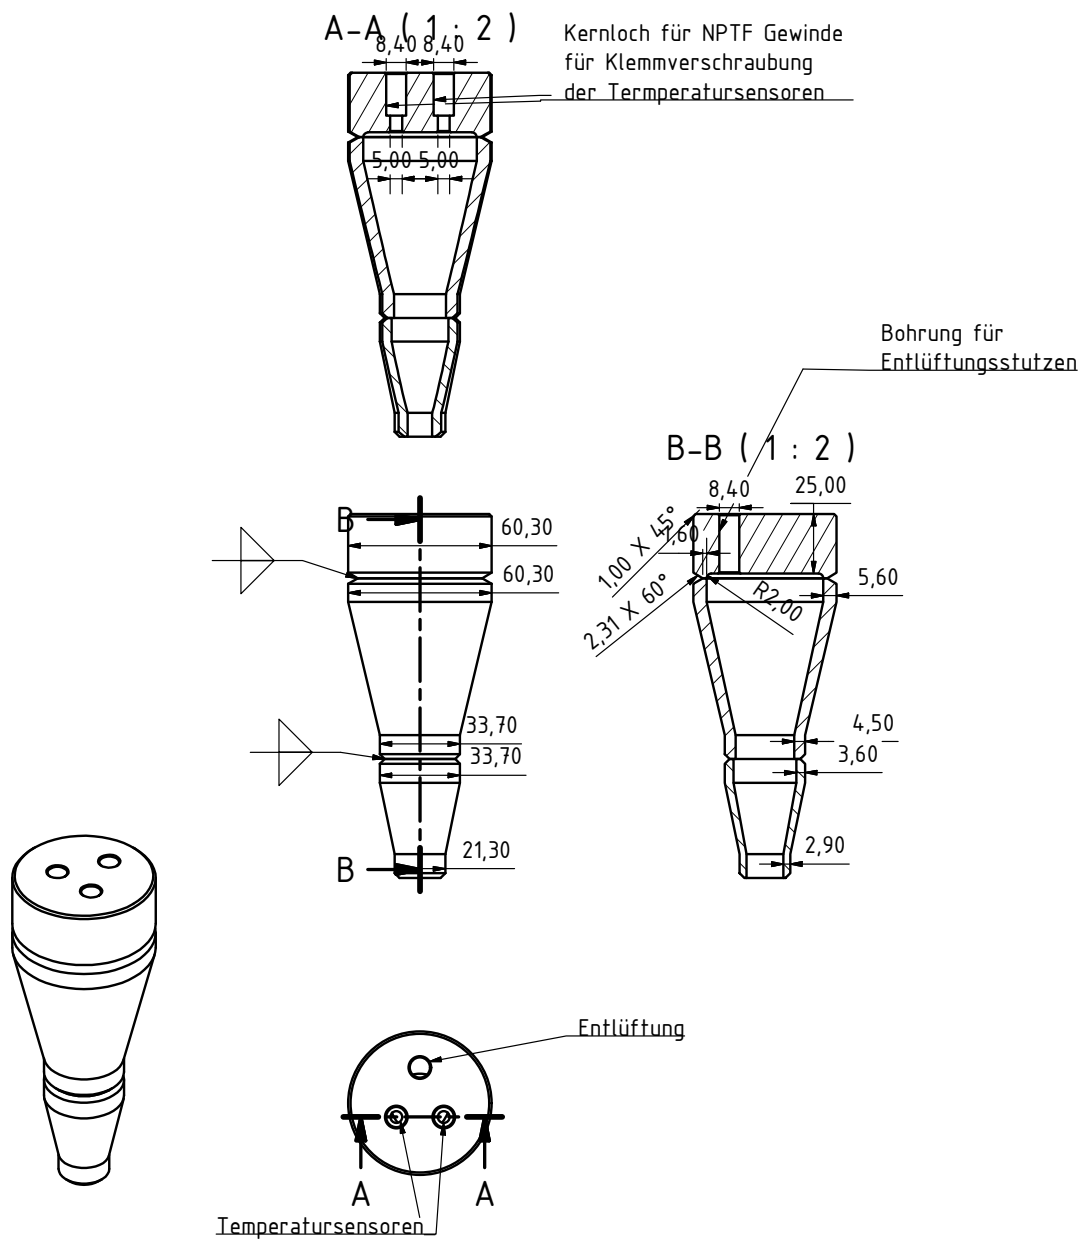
Technical drawing of the temperature measurement chamber for the heat exchanger
